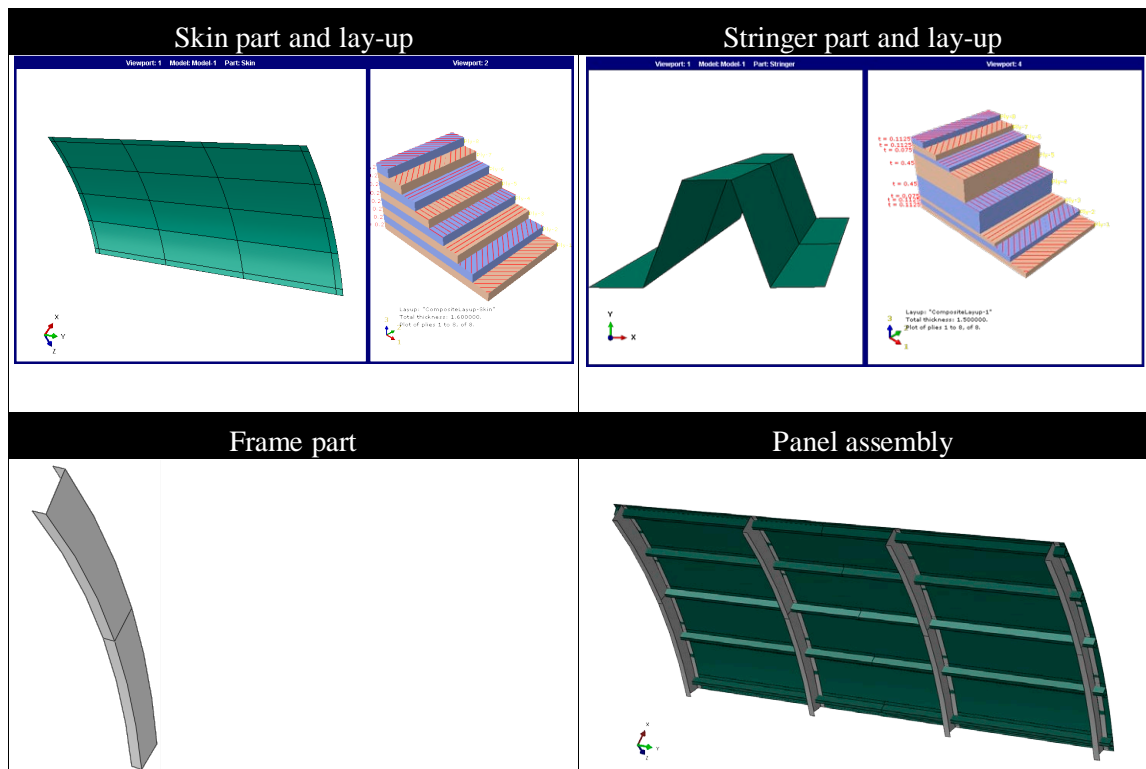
The DFEM panel model assembly and its parts. For skin and stringer the part geometries and the composite layups are shown. Frames are aluminium.
